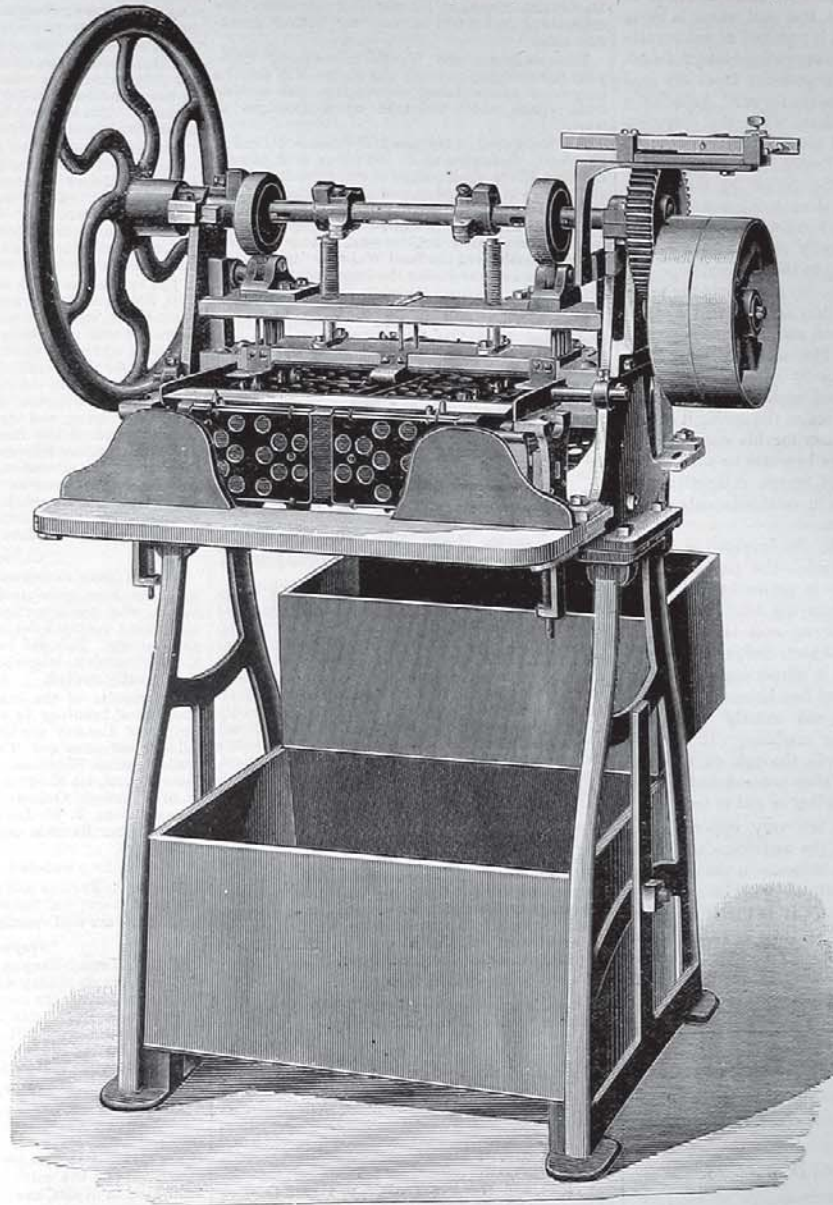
PEG AND LACE HOLE CUTTING MACHINE.—MR. J. M^CMURDO, MILES PLATTING, MANCHESTER.
